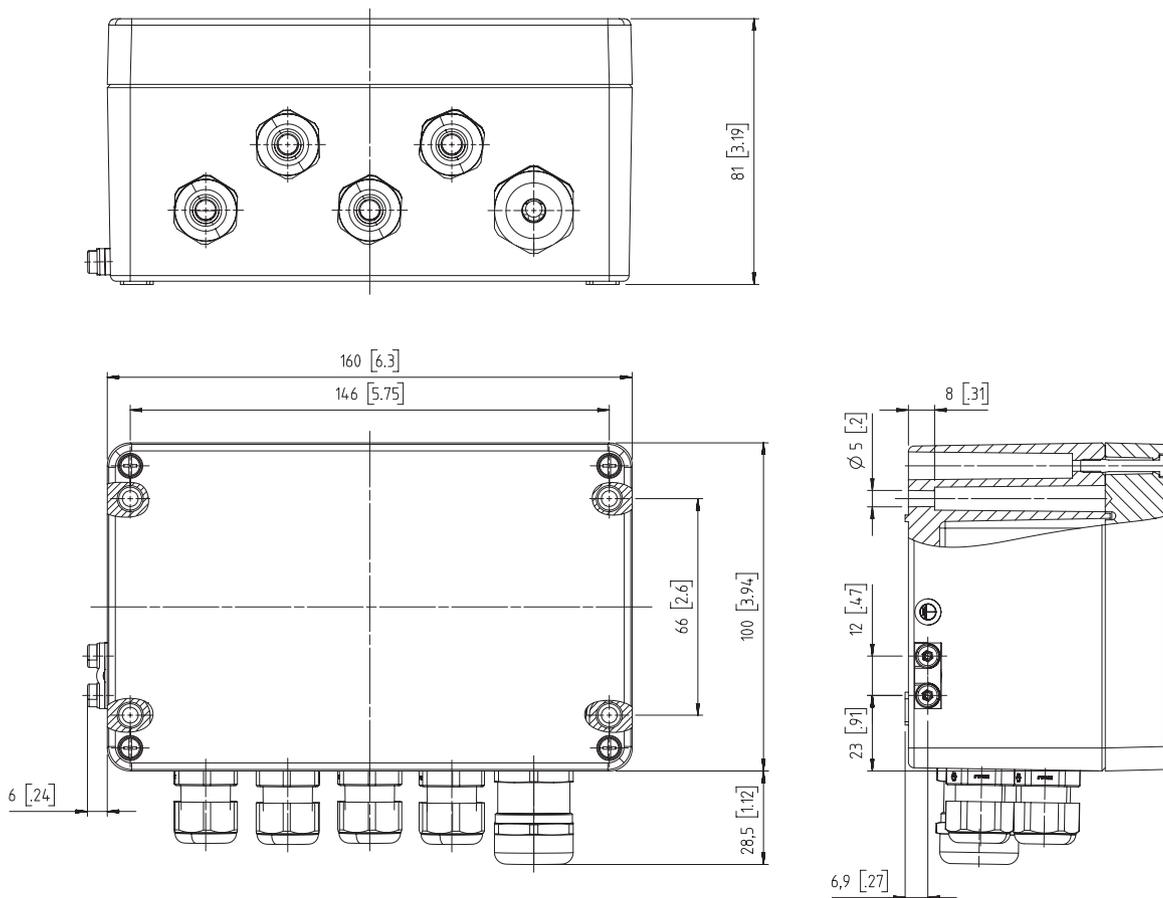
Dimension drawing aluminum enclosure, dimensions in mm [inch]
